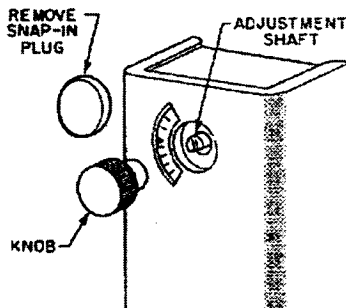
Drawing showing snap-in plug removed and the knob in line to assemble. Press the knob onto the slotted shaft.
